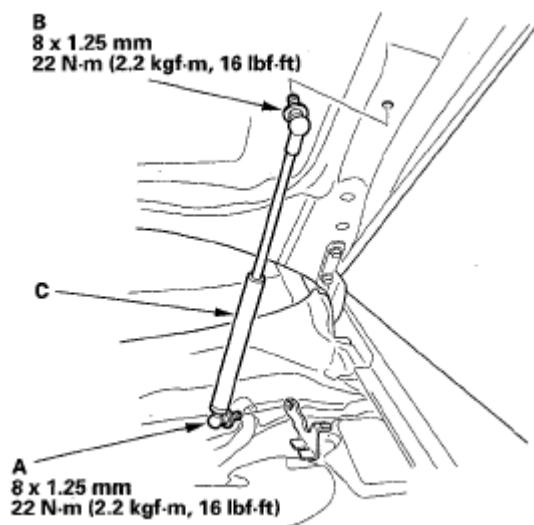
Identifying Pivot Bolt Of Body With Torque Specifications
